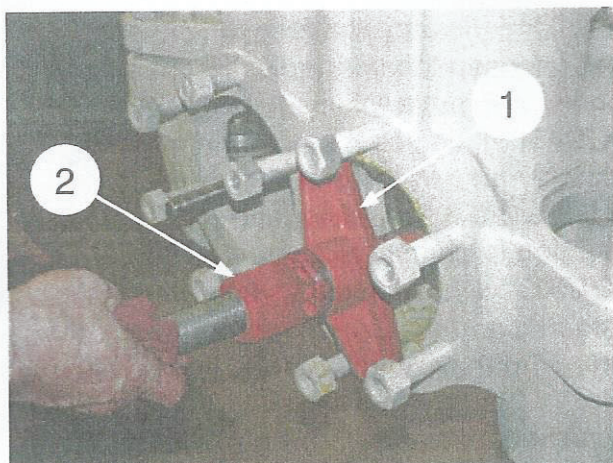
Mud Pump Liner Removal; Because of the tightness resulting from the proper installation of this assembly into the pump housing, a liner puller is required for removal. Insert the puller [1] such that its pulling shoulders engage the inboard or back face of the liner. Slowly tighten the puller rod nut [2] until the assembly can be removed.
